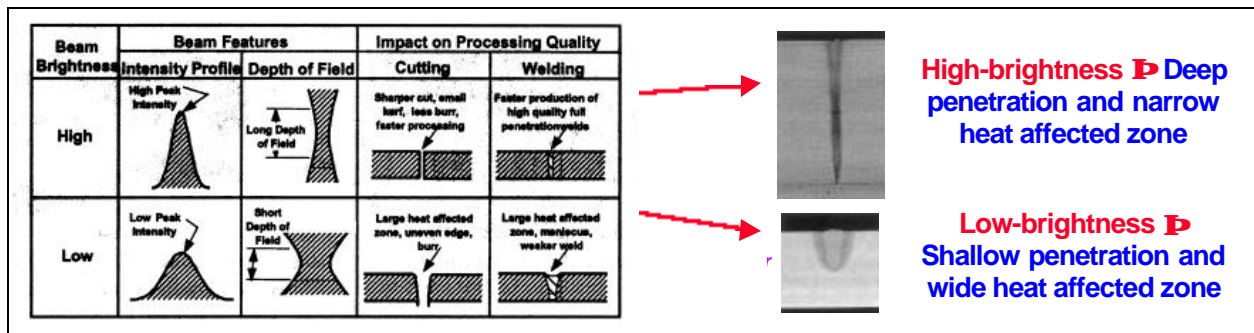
High-brightness SSL enable precision cutting and deep-penetration welding (photos courtesy of Caterpillar Corp.)
